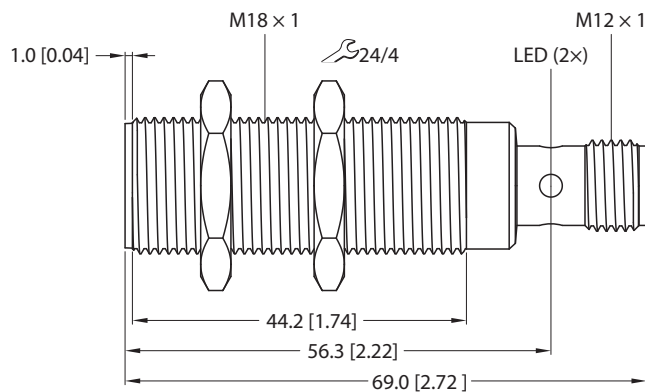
Dimensional drawing BI8-M18-2APS8X2-H1141
